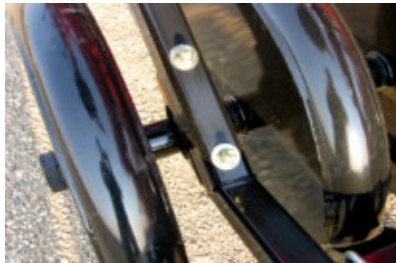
Pillow Block Bolts (Torque to 75 ft-lbs)
